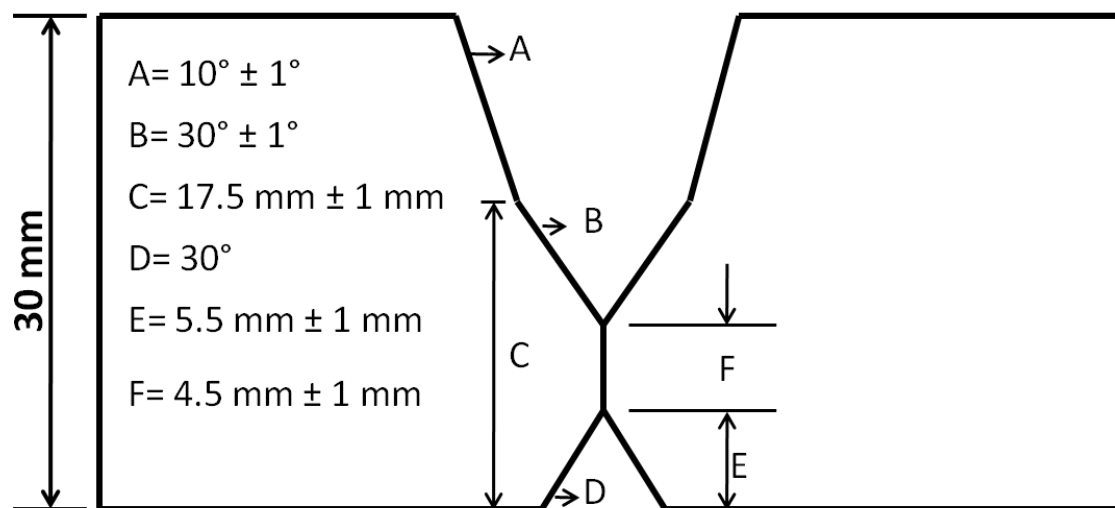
Submerged arc welds narrow bevel design
